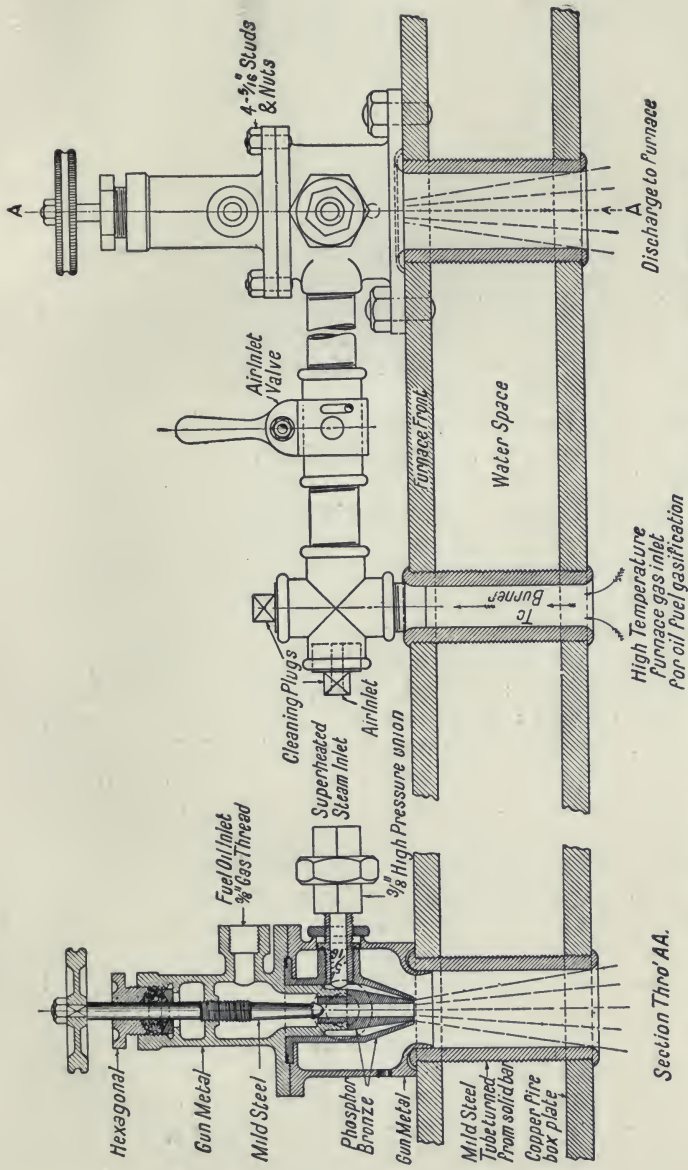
ASSEMBLY OF GREGORY'S FUEL OIL BURNER FOR LOCOMOTIVE FURNACES.
